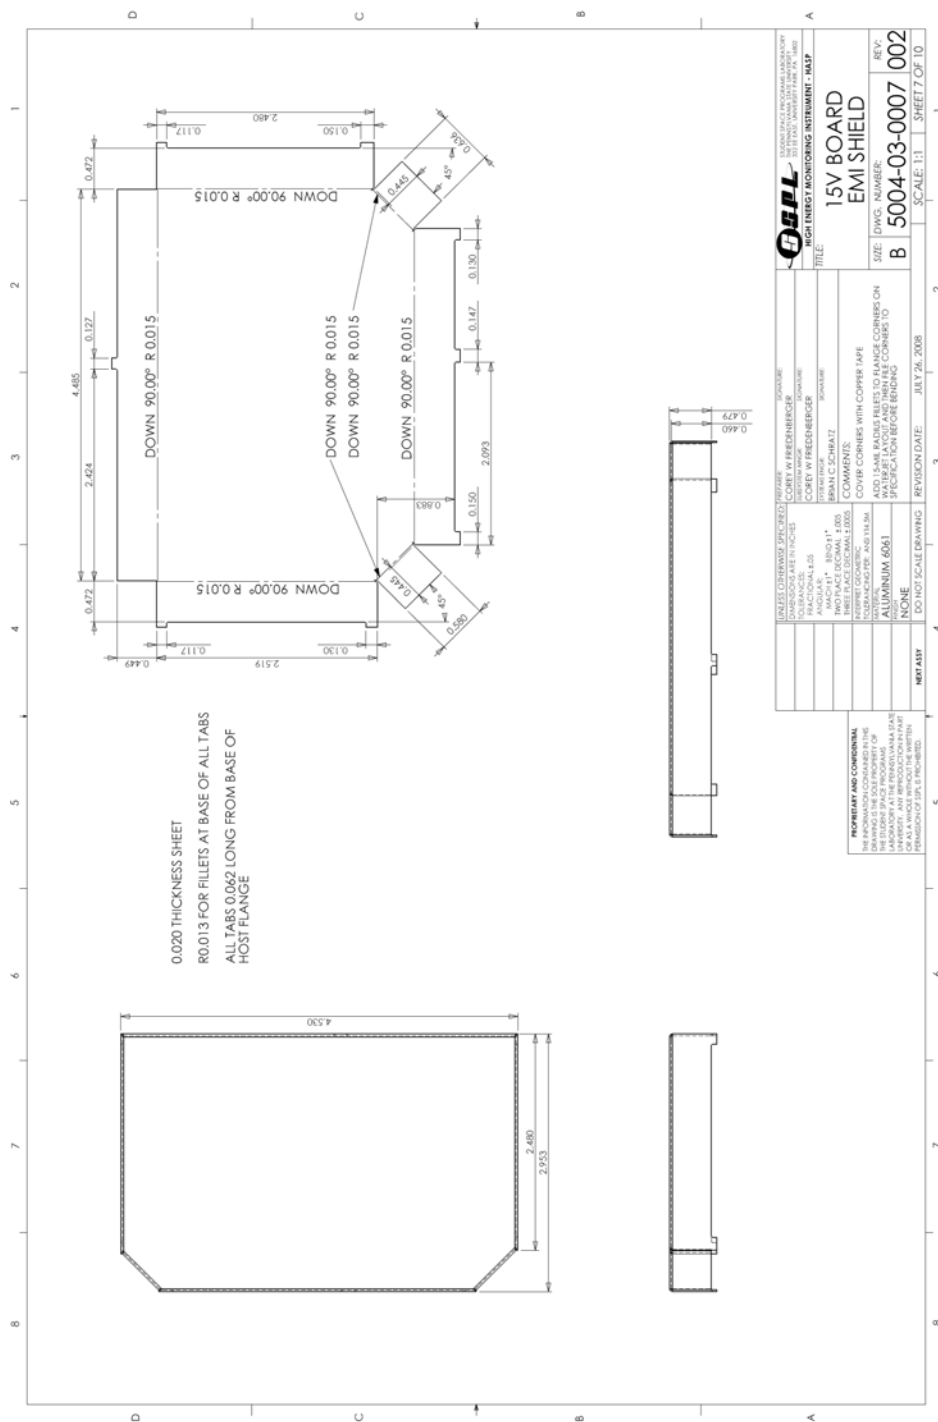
Mechanical Drawing: 15-V Board EMI Shield
